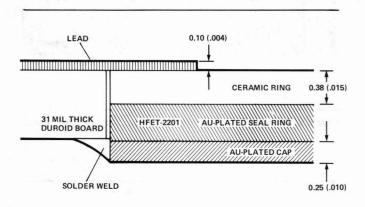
Cross Sectional Drawing of Duroid Mounting.
